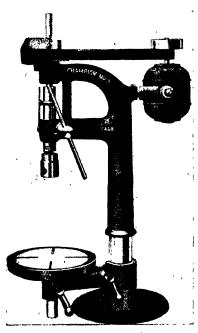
Motor-driven ½-in. diameter bench drilling machine
